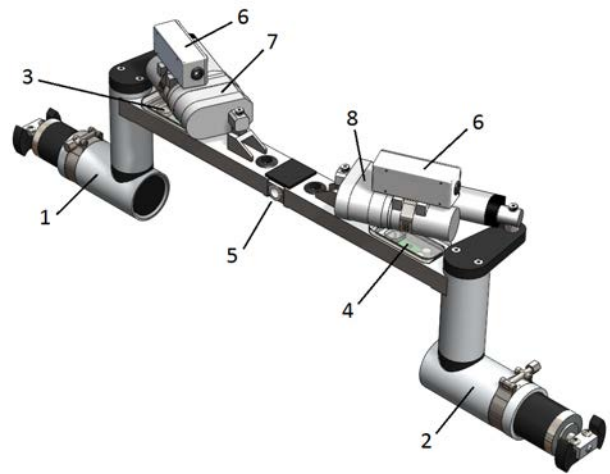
Overview of rear rocker sub-assembly (1) Left rear drive motor assembly (2) Right rear drive motor assembly (3) Left rear drive motor controller PCB, mounted *inside* the rocker (4) Right rear drive motor controller PCB, mounted *inside* the rocker (5) Rocker Hinge, connection point to chassis (6) Steering mode linear actuator motor controller PCBs within protective housing (7) Left rear steering mode linear actuator (8) Right rear steering mode linear actuator
